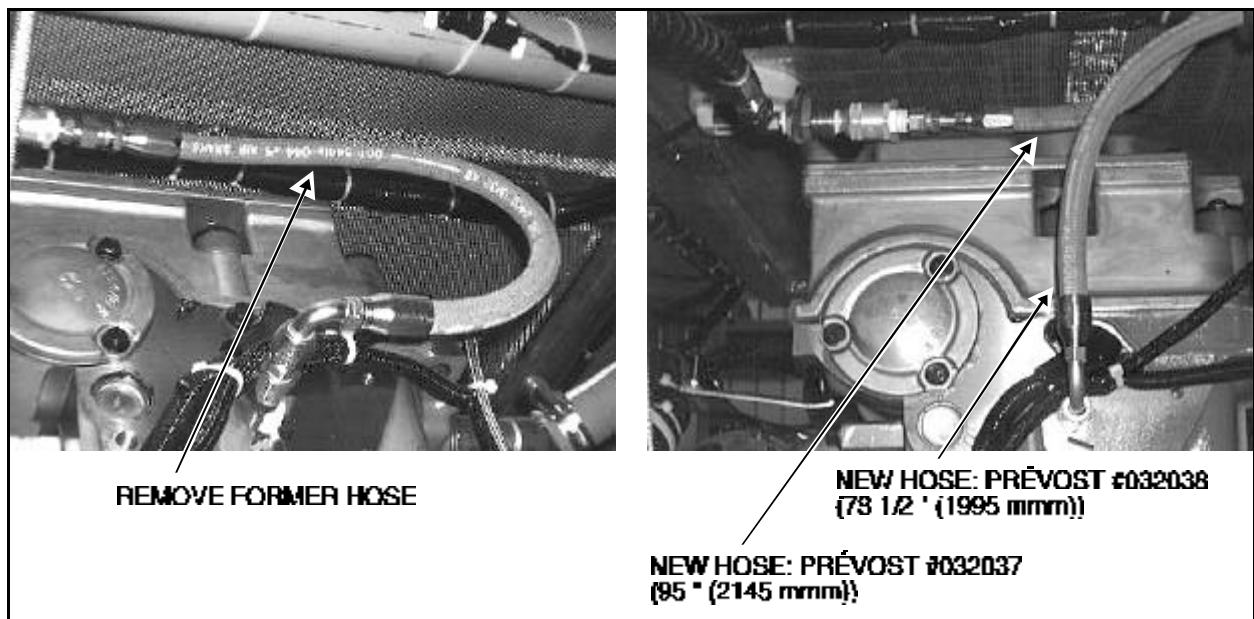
FUEL COOLER HOSES ON ENGINE
